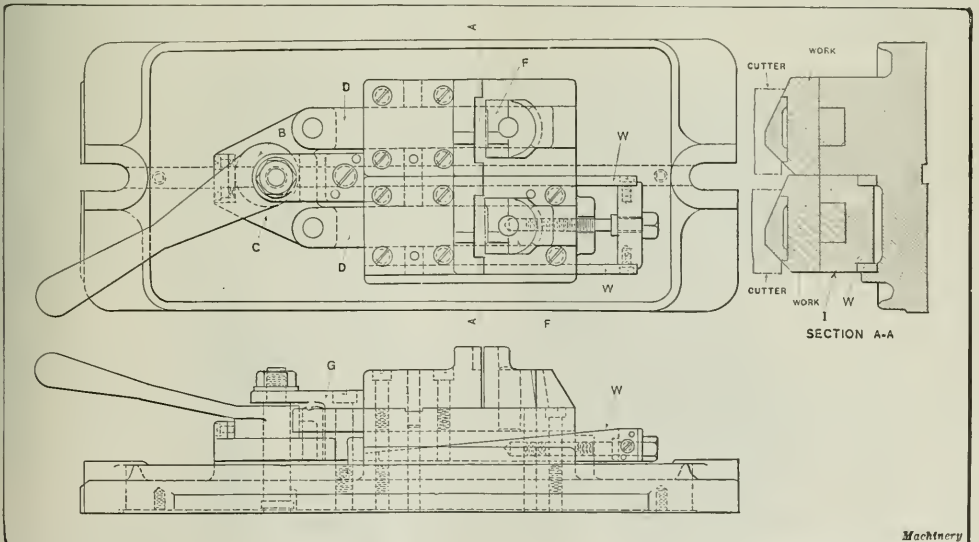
Fixture Similar to that shown in Fig. 2, but with only One Cam for clamping the Work
